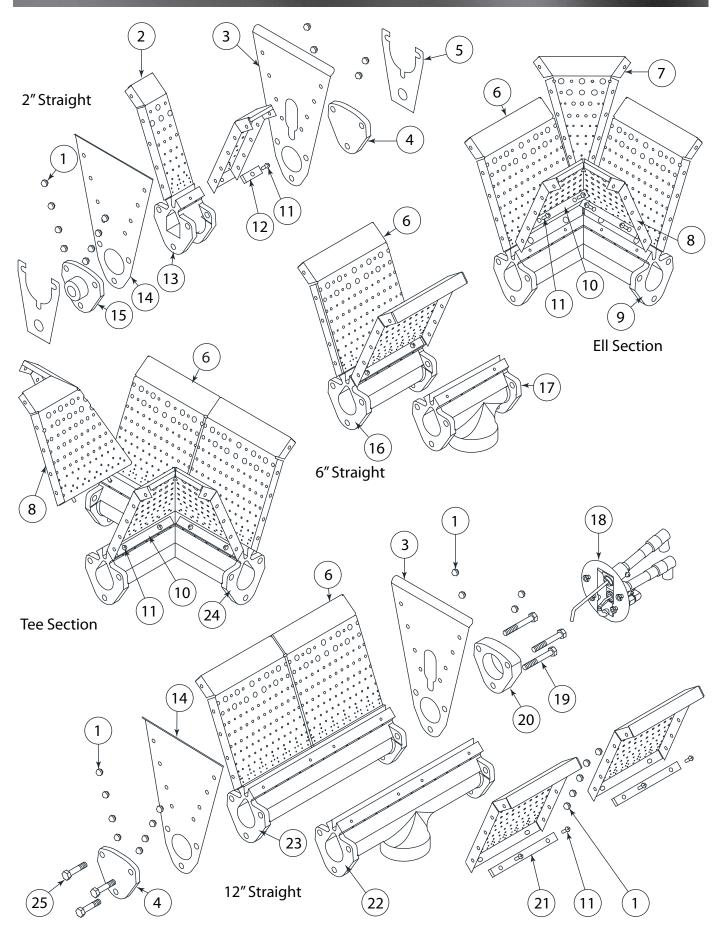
Typical Burner Assembly Parts - Isometric View Midco International Inc.
